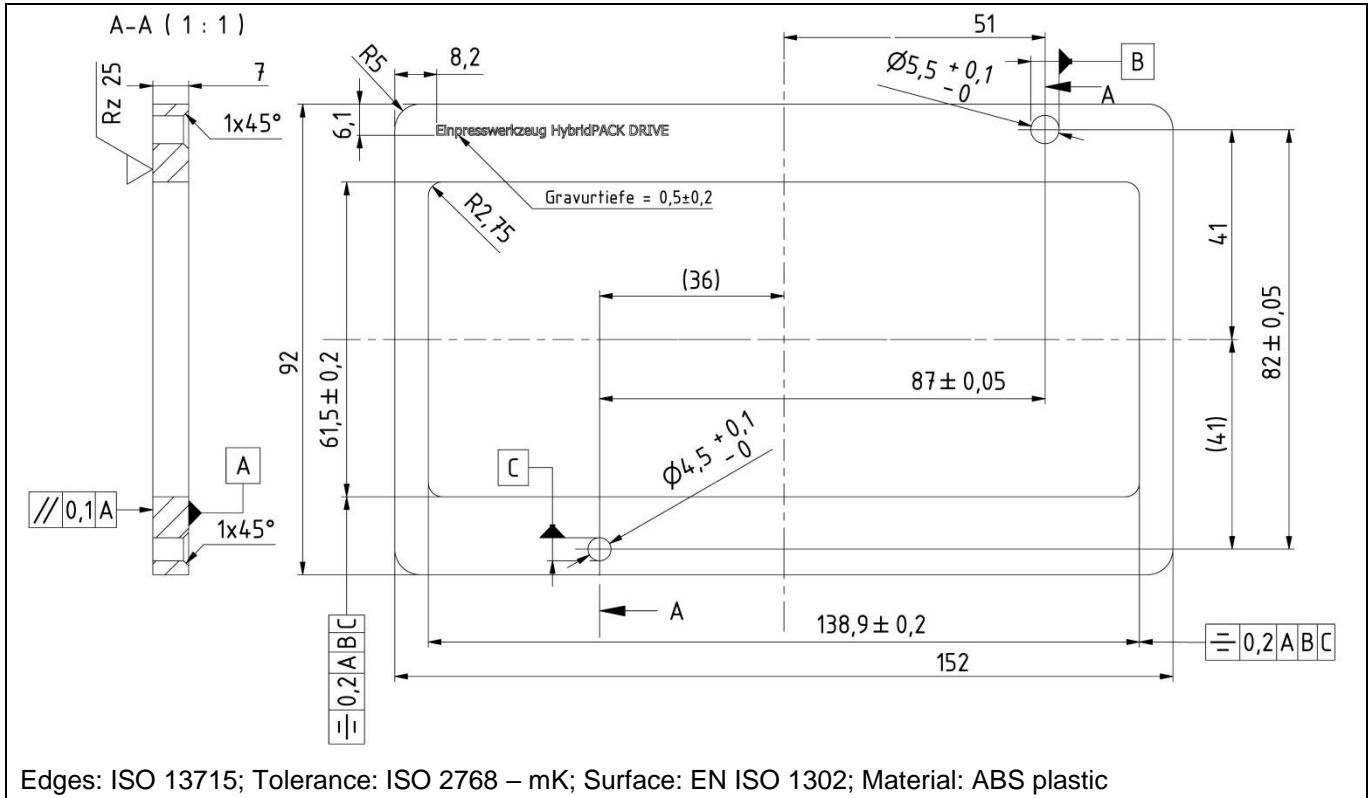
Technical drawing of the sample press-in tool (Bottom Tool).
